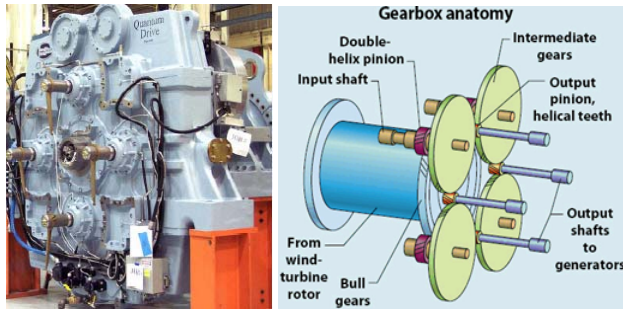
Clipper Quantum Drive, gearbox architecture [8], [9]
